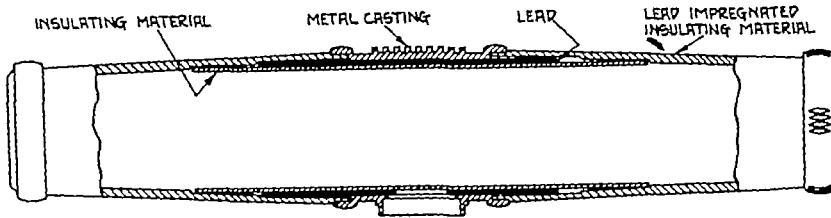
Section of a removable x-ray protecting cover for tube shown in Figure 1-B
